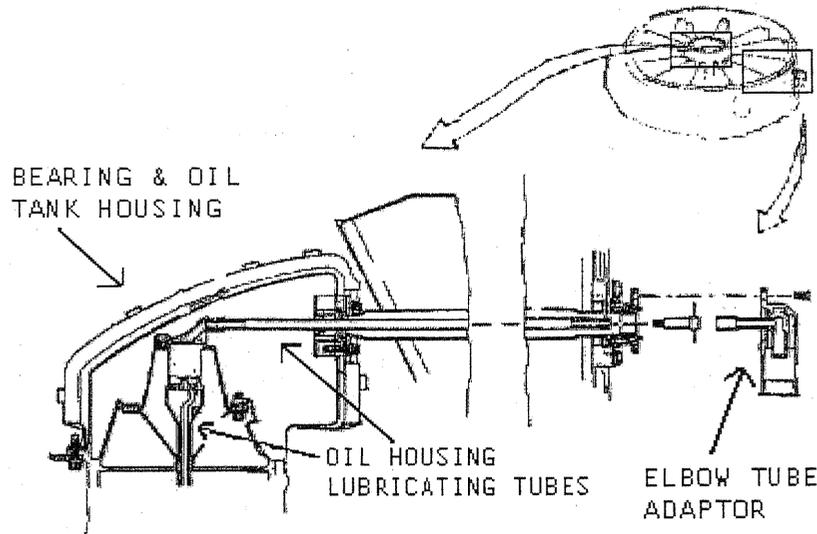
ENLARGED CUT-AWAY VIEW OF MRA
